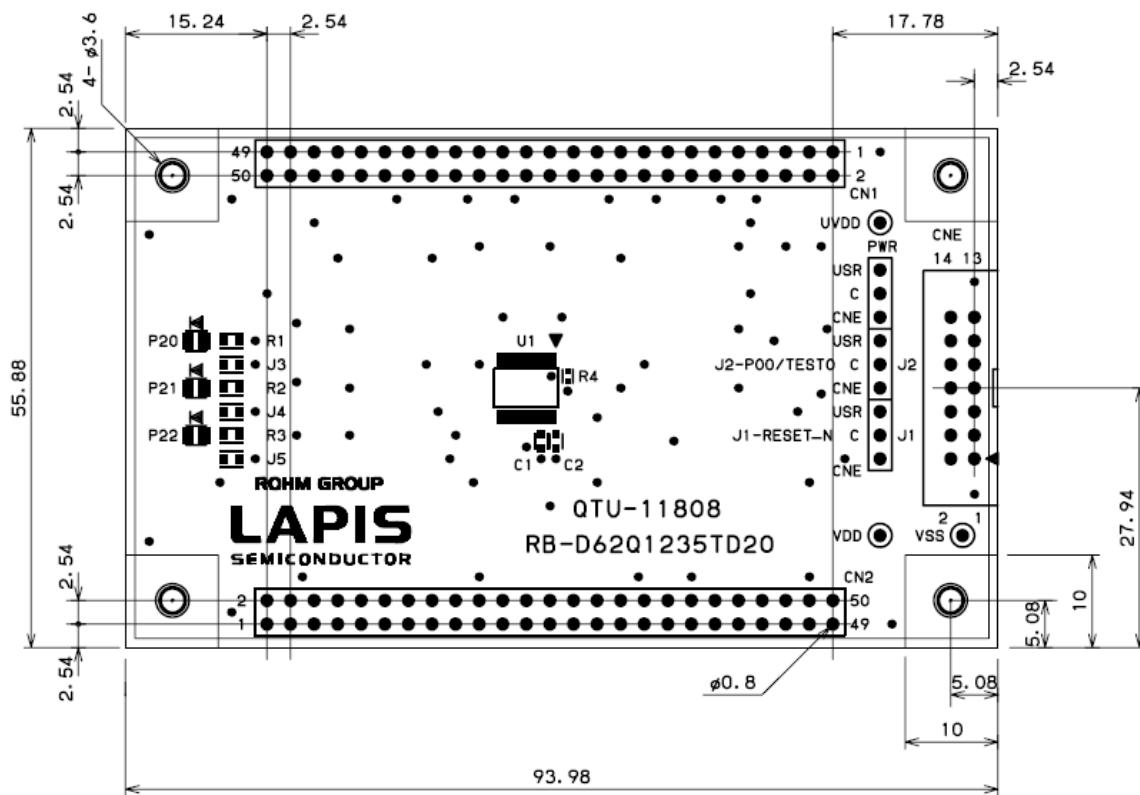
Reference Board PCB dimensional outline drawing and layout of components (Top view)
